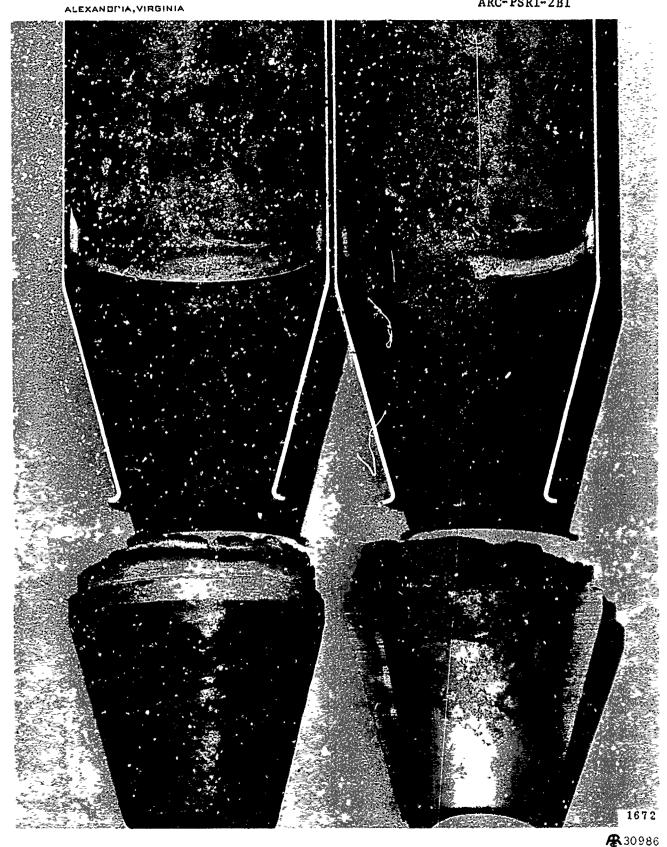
Nozzle End of Motor ARX-12 After Firing at 70°F with Two-Piece Insulation Sleeve.
